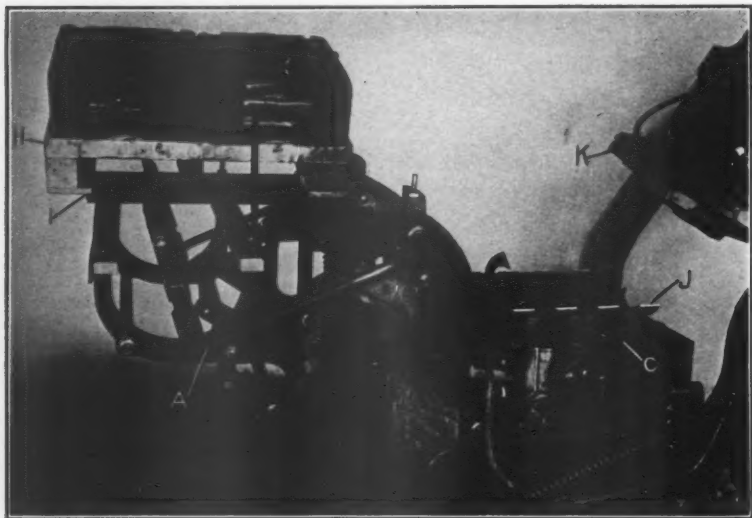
GOW ROLL-OVER CORE MAKING MACHINE.
